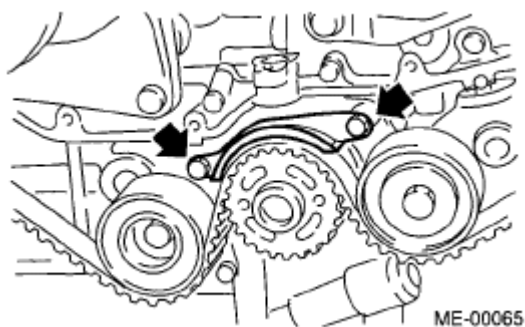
Locating Timing Belt Guide Bolt (MT Model)
